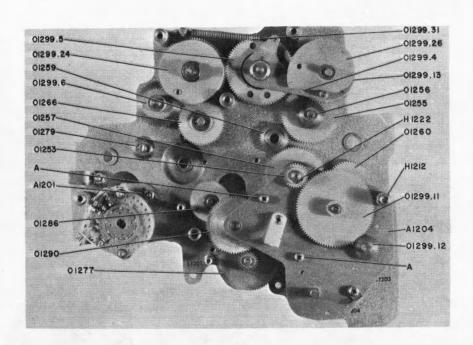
Frequency Selector, Front View of Rear Plate (AN/URC-9A)
